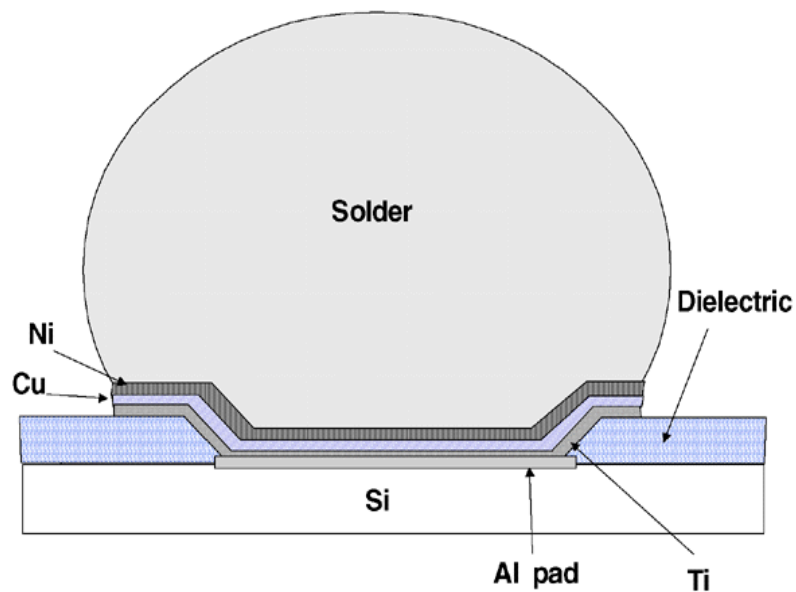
The schematic of solder bump for a flip-chip interconnect in electronic packaging (Frear, 1999).
